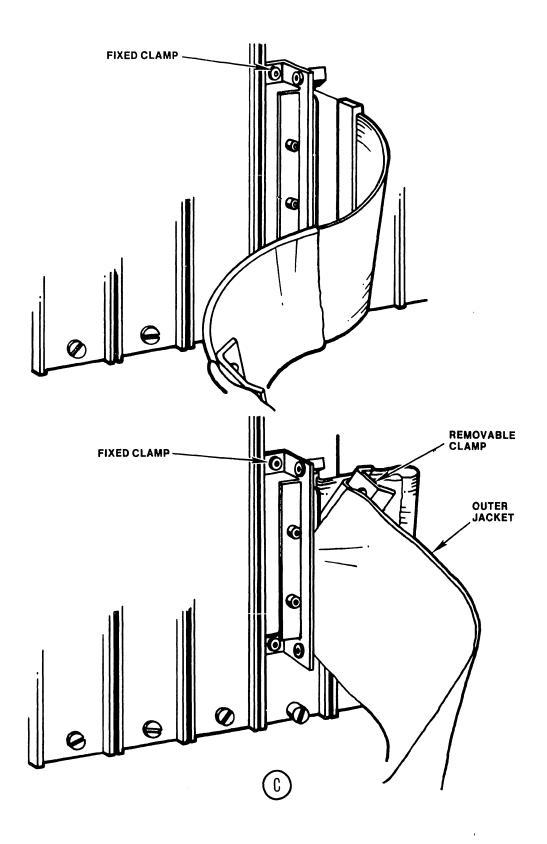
Shielded Cable Installation (Sheet 2 of 3)
